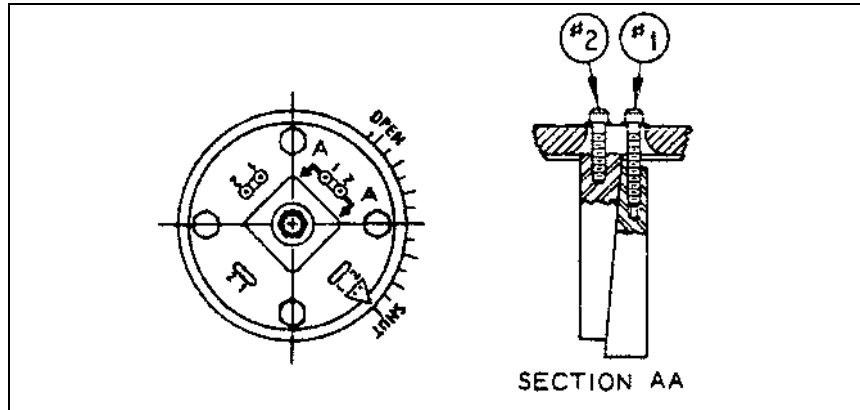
24" thru 36" Key and Lockscrew Arrangement
